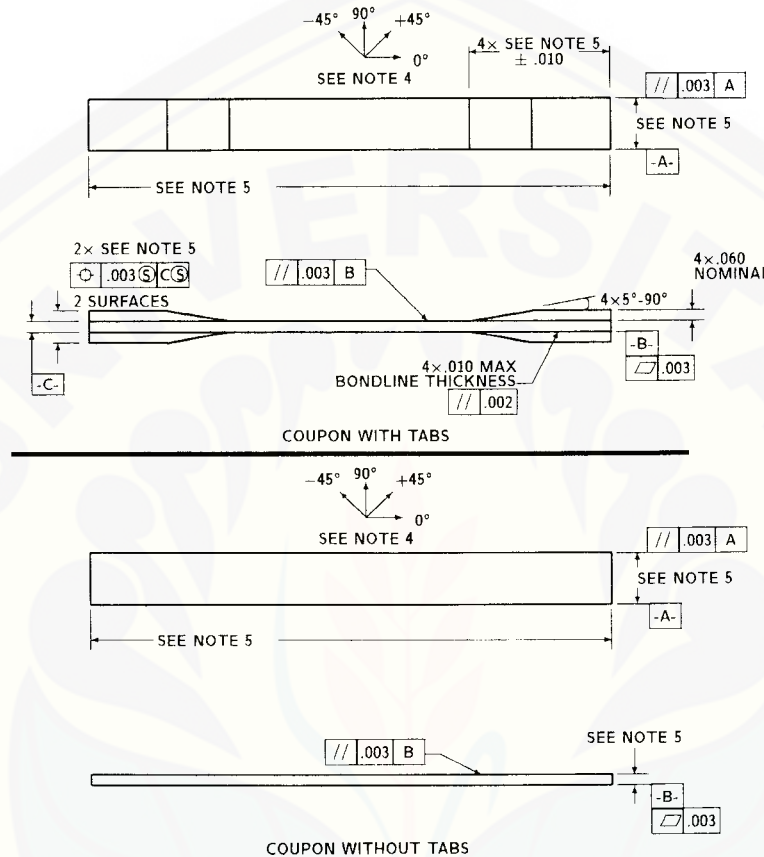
Tension Test Specimen Drawing (inch-pound)
